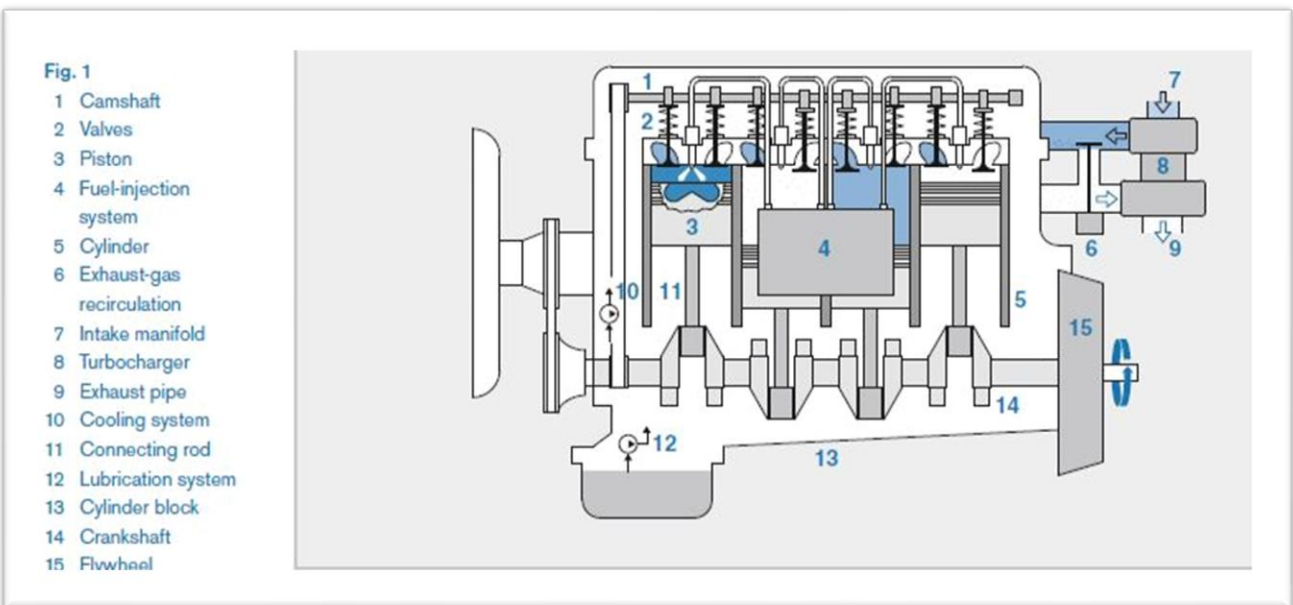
Schematic of the four cylinder diesel engine with different parts labelled
